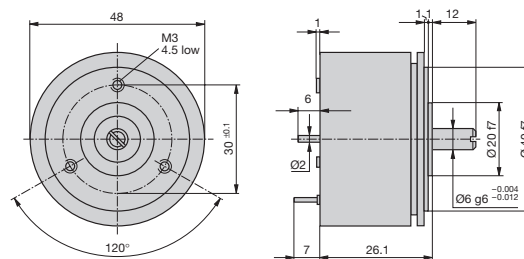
KINAX 3W2 with special drive shaft at front and at rear.
